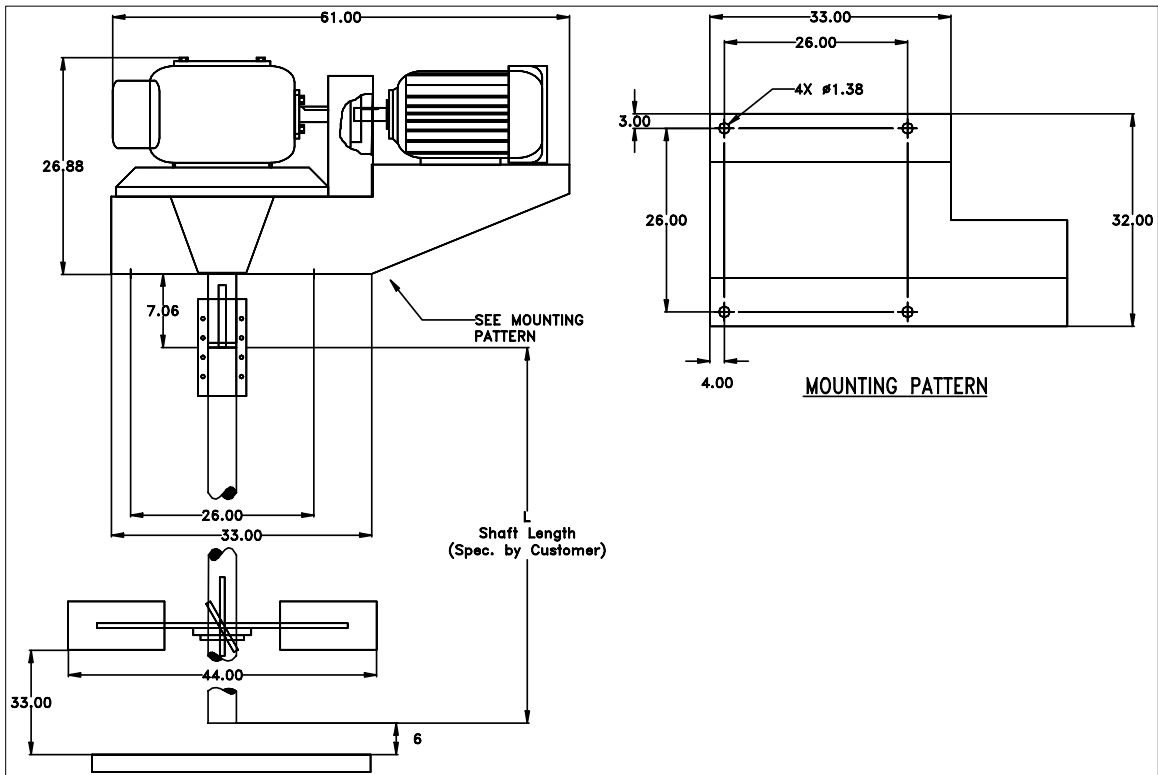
DIMENSIONAL DRAWING MA-20
